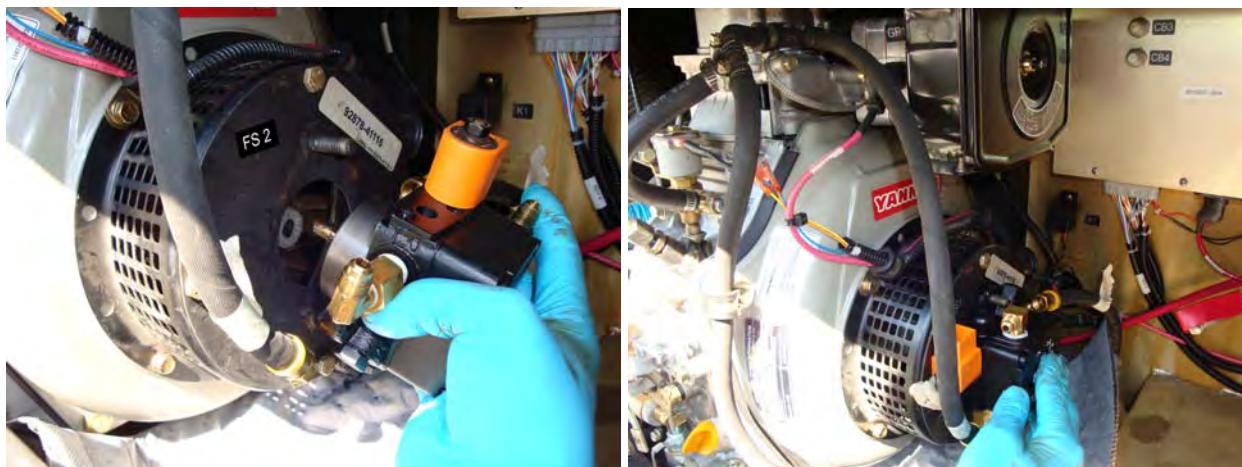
Engage Burner Fuel Pump Shaft into Drive Shaft Coupling.
